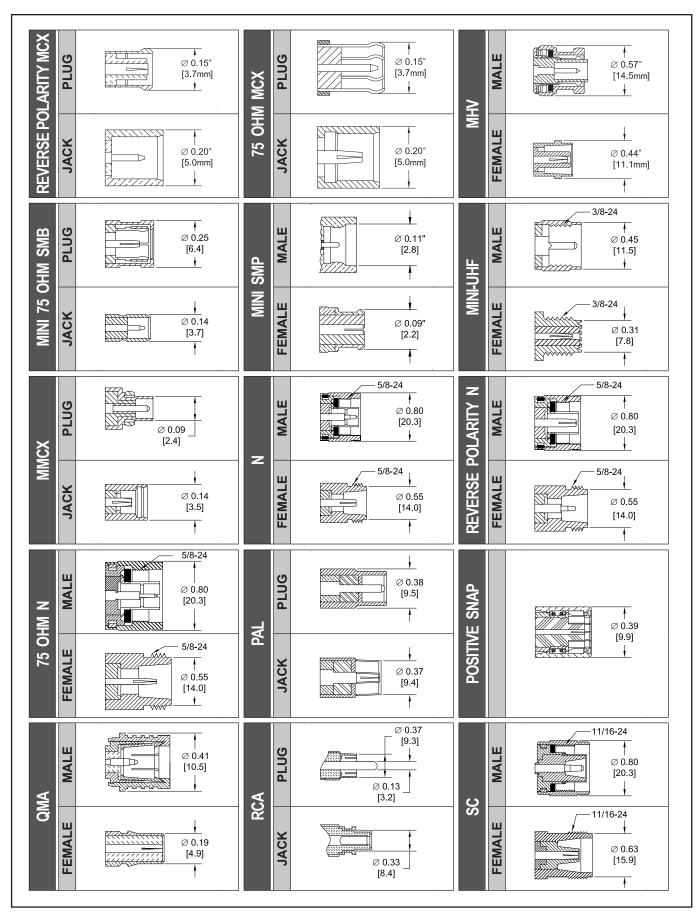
C — Connector side views, set 3 of 4. [Courtesy of Pasternak]
